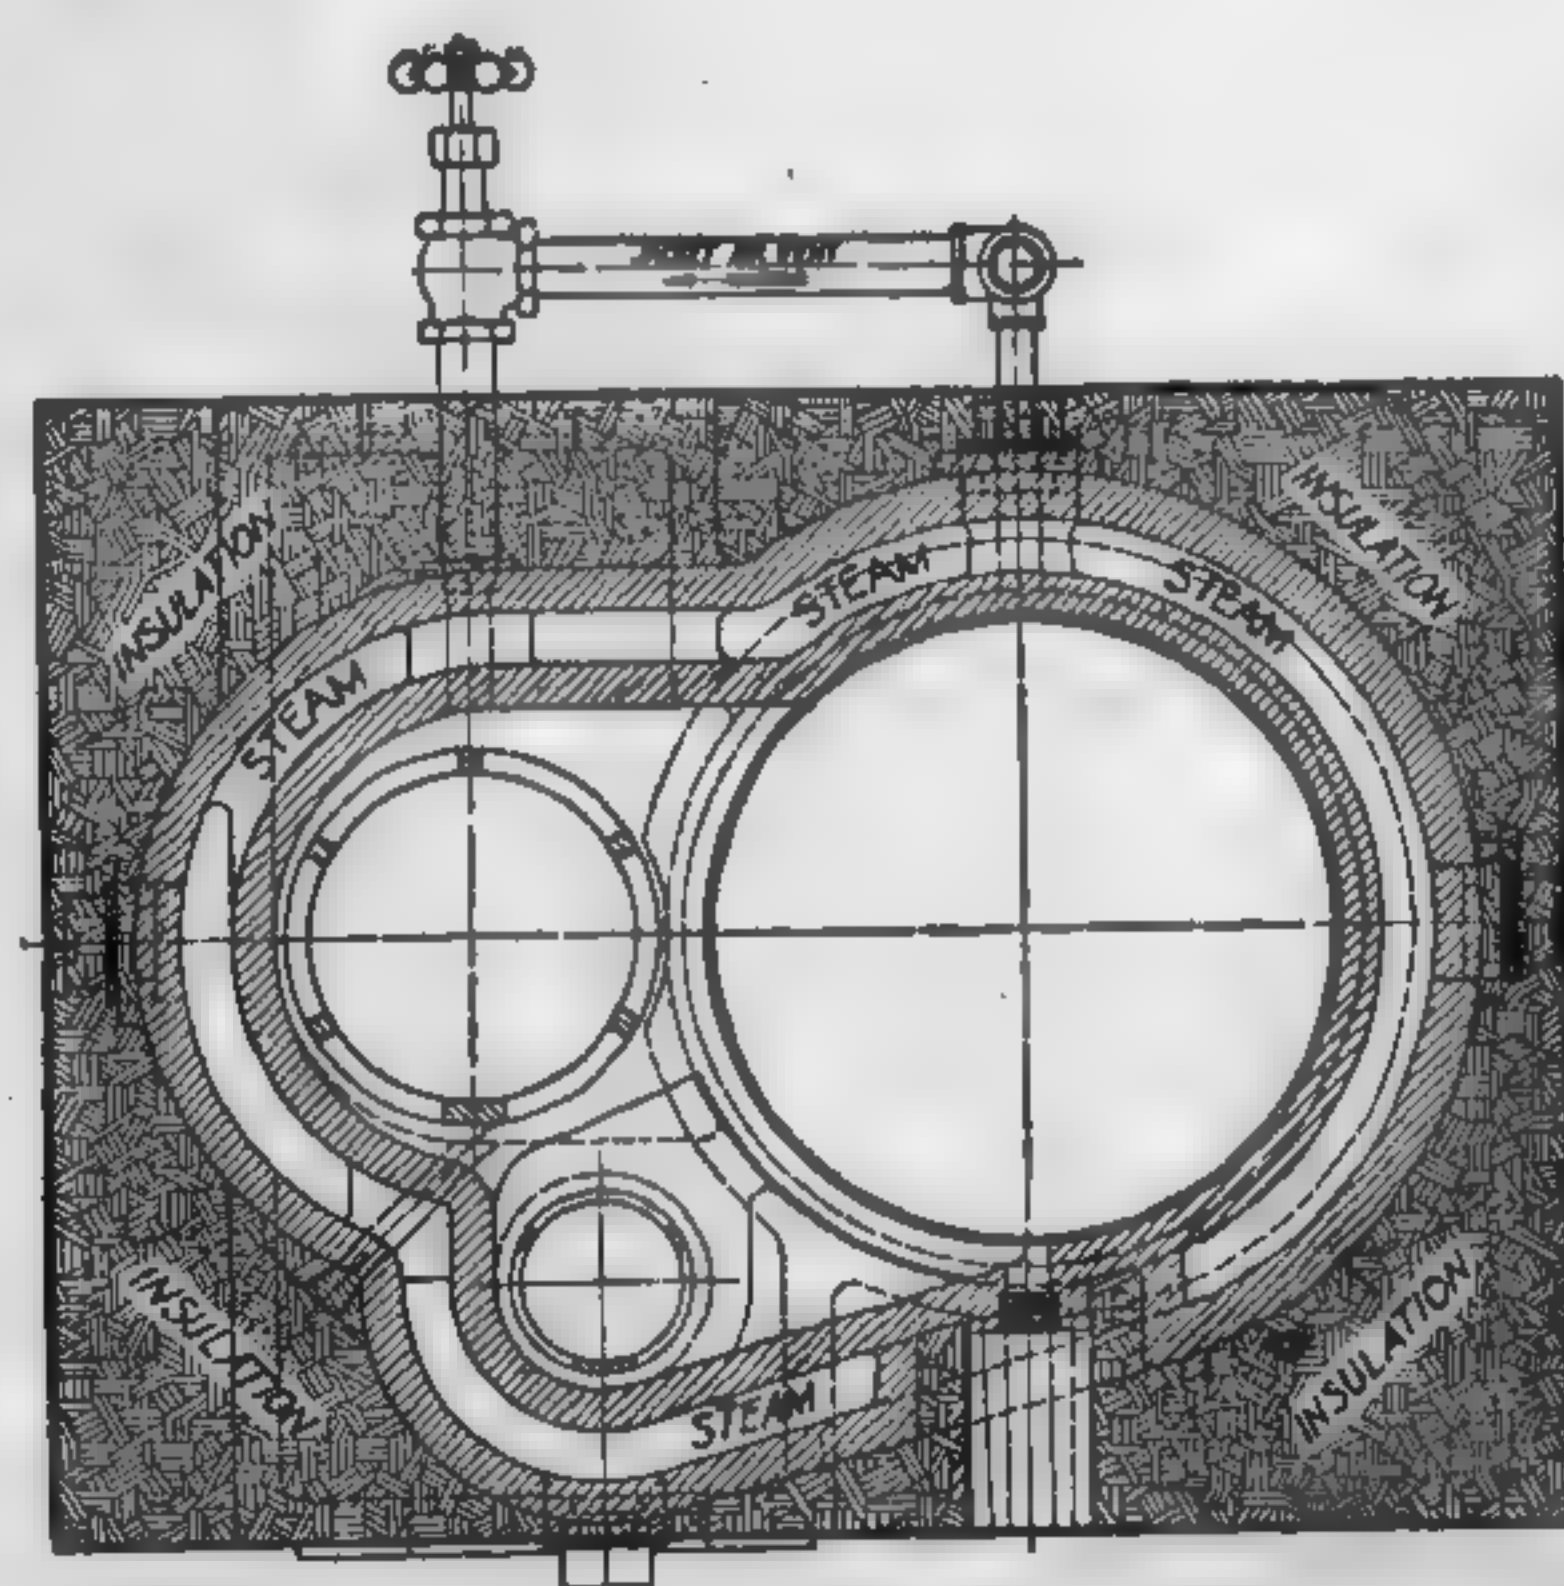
Prosser "High-economy" Engine — Transverse Section through Cylinder.
